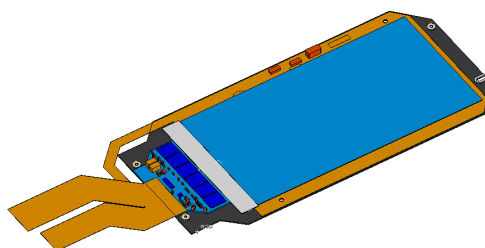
Drawing of a CMS barrel module. One can distinguish the carbon-fibre frame with the silicon sensors and their readout electronics.
